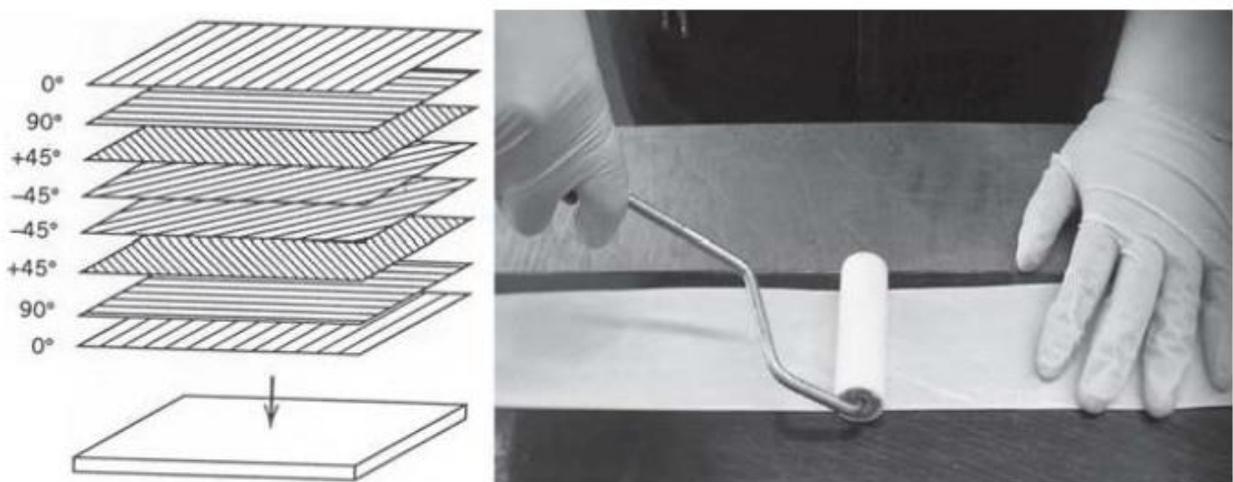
Schematic of the hand-lay-up fabrication method and a representative lay-up sequence. Individual layers can be cut by hand or by a computerized machine cutter. The layers can be stacked one on top of the other by hand or by a robot.
